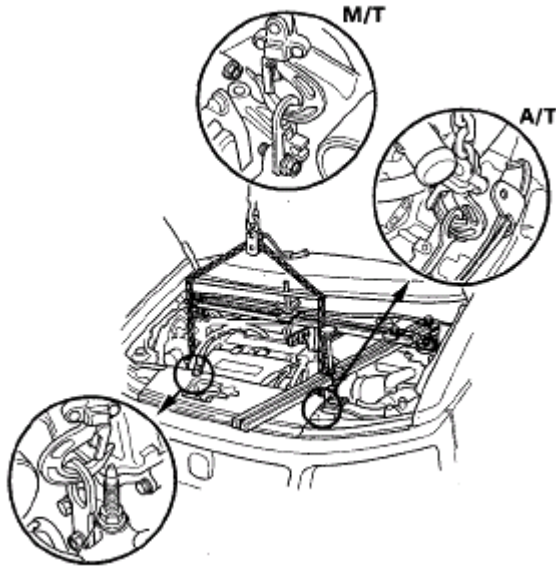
Attaching Chain Hoist To Engine/Transmission
